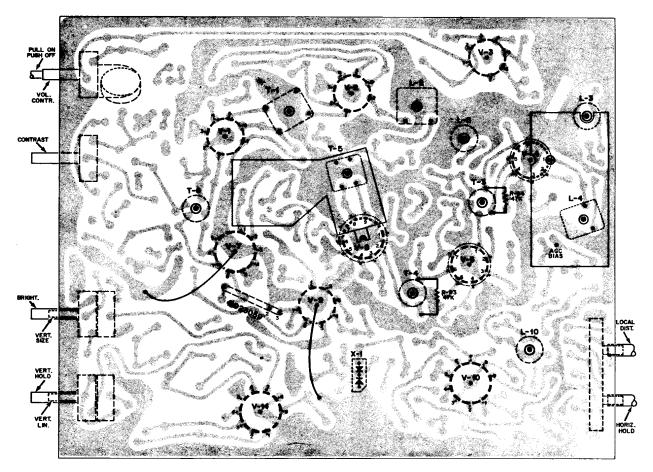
ETCHED PRINTED CIRCUIT BOARD CHASSIS (BOTTOM VIEW)
